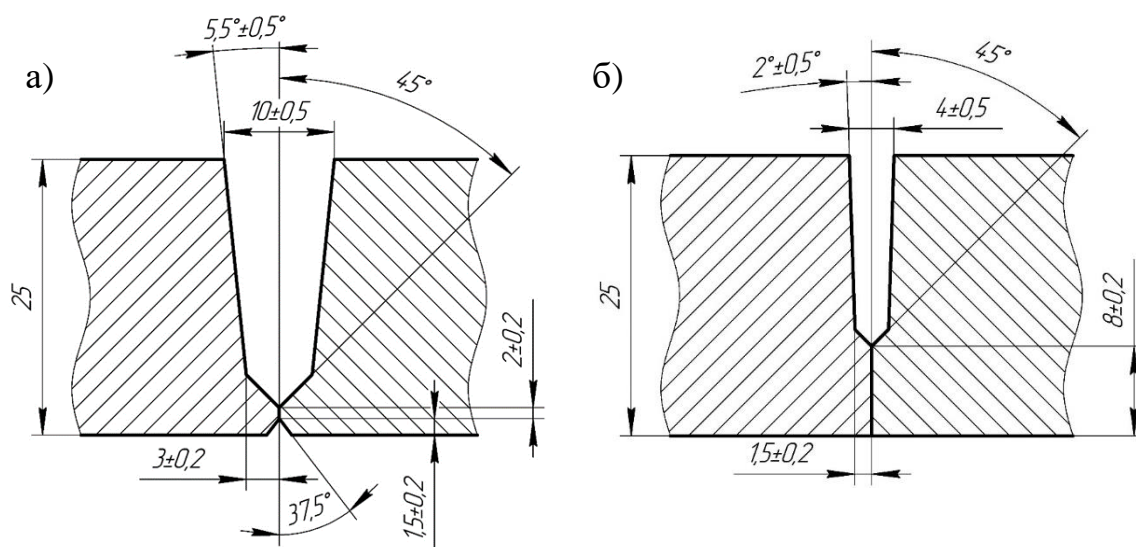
Edges: a) for welding with the CRC-Evans complex; б) for laser welding
